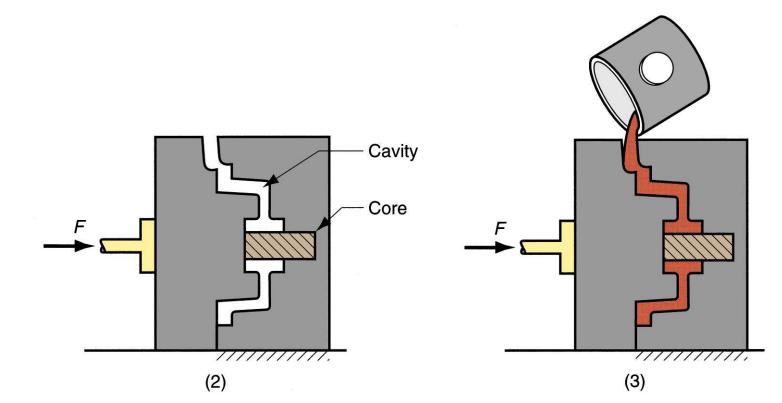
Steps in permanent mold casting: (2) cores (if used) are inserted and mold is closed, (3) molten metal is poured into the mold, where it solidifies.
